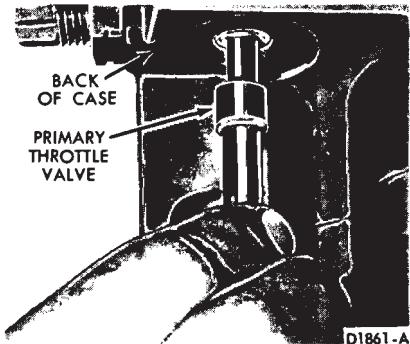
Removing or Installing Primary Throttle Valve—C4 Automatic
